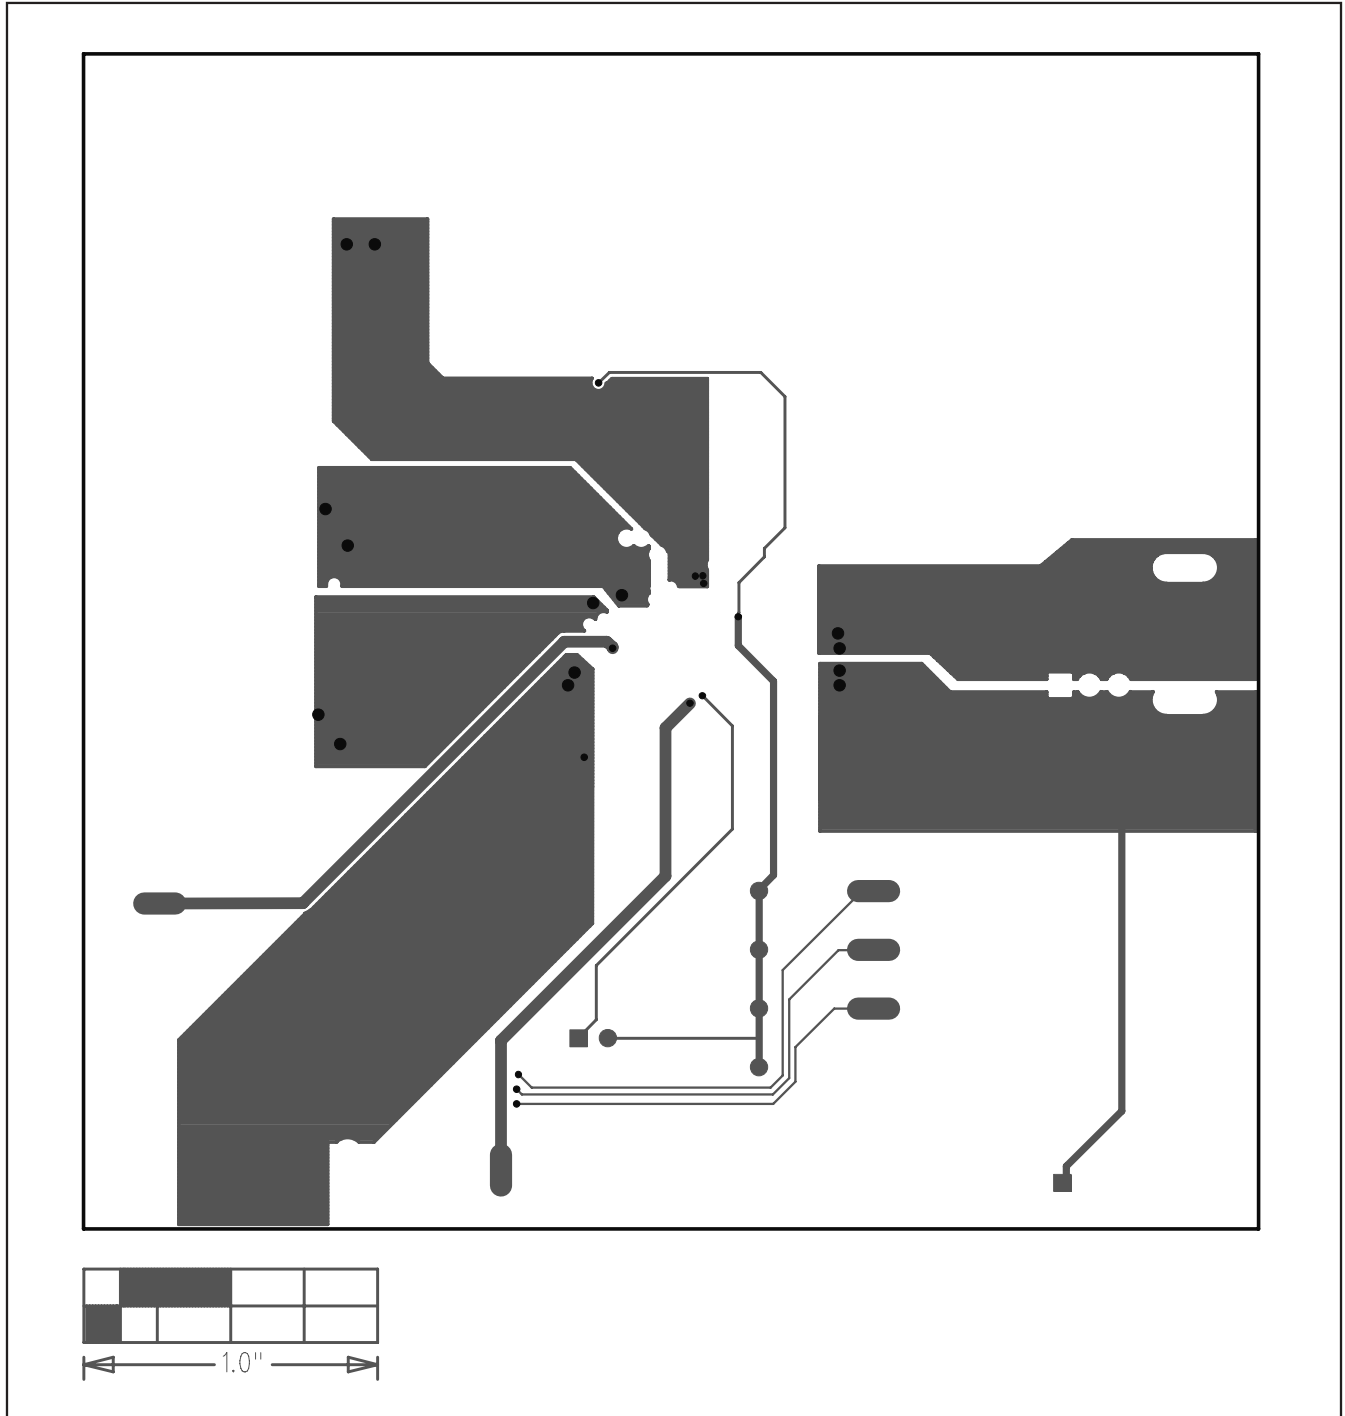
MAX8671 EV Kit PCB Layout—Power Layer 4
